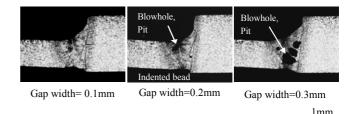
Cross section of laser weld of differential thickness TWB
